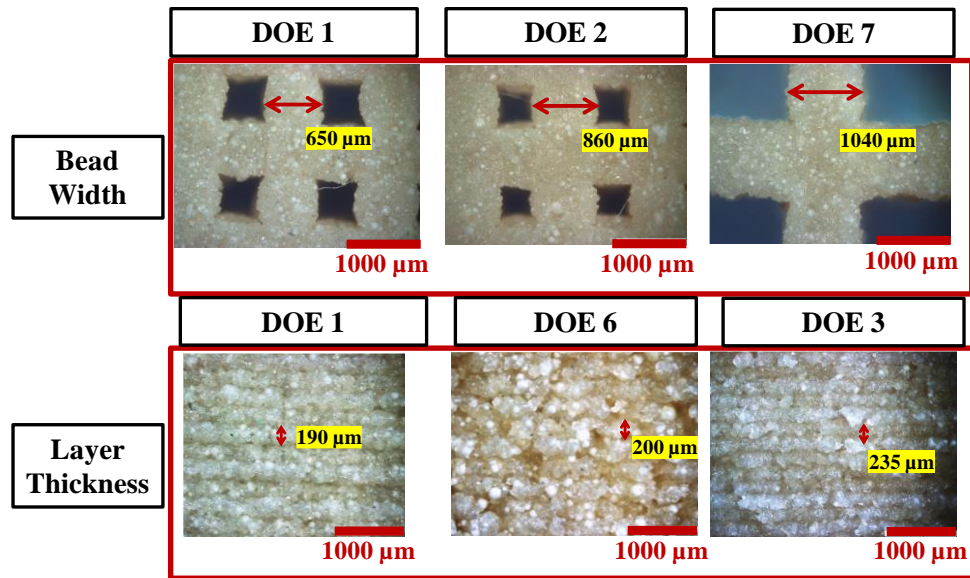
Representative images of bead width and layer thickness for CF³ 3D printed HAp parts printed using different print parameters.
